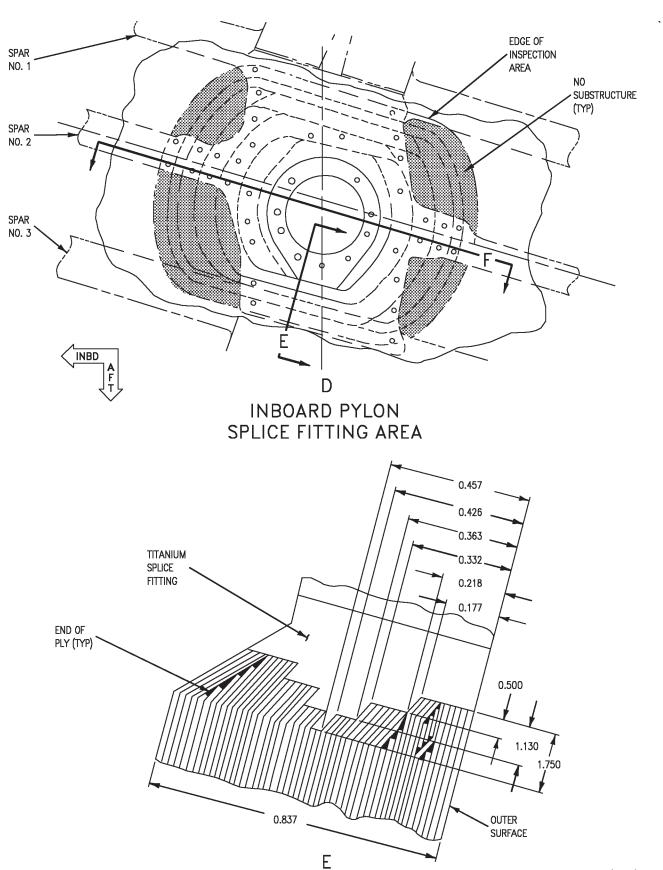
Inner Wing Lower Surface Titanium Splice Fitting Inspection Areas (Sheet 4)
